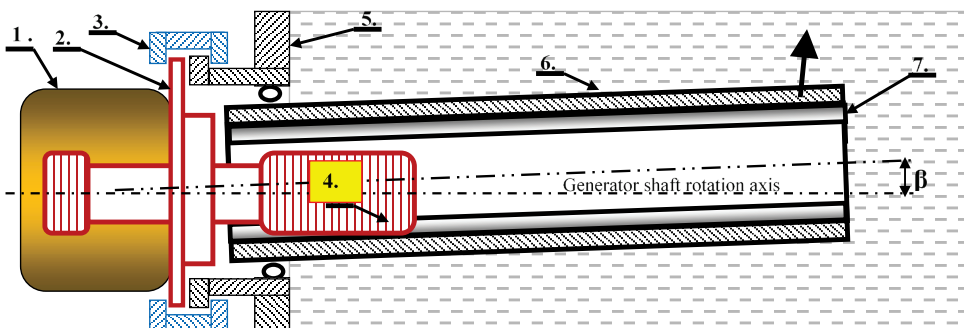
Longitudinal section of a splined connection (generator shaft) with a drive sleeve exhibiting eccentricity and skew defects: 1 – generator body, 2 – generator mounting flange, 3 – mounting bracket, 4 – generator splined shaft, 5 – gearbox housing, 6 – drive sleeve with internal splined teeth, 7 – drive sleeve splined tooth
